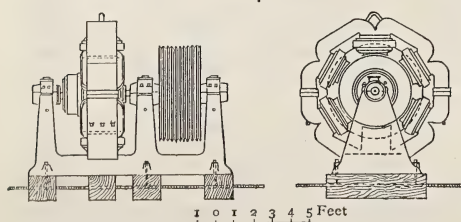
shows a drawing of these generators. Fig. 3 is a drawing of the twin motor, which receives the bulk of the power at the spinning mills, whilst the remainder is taken up by a couple of two-pole motors, placed in other parts of the mills. These are not shown on the diagrams, as they are of the ordinary design, with which you are already familiar. The twin-motor is rated at 380, and each of
